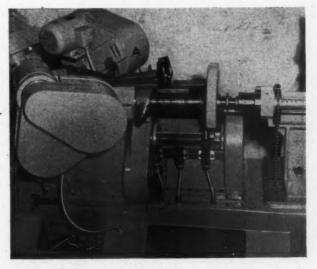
In this close-up view may be seen the barrel pinion and the driving gear for the work spindle and lead bar assembly. The inclined bar A controls the amount of swivelling movement imparted to the bearing housings for the flute-milling spindles
